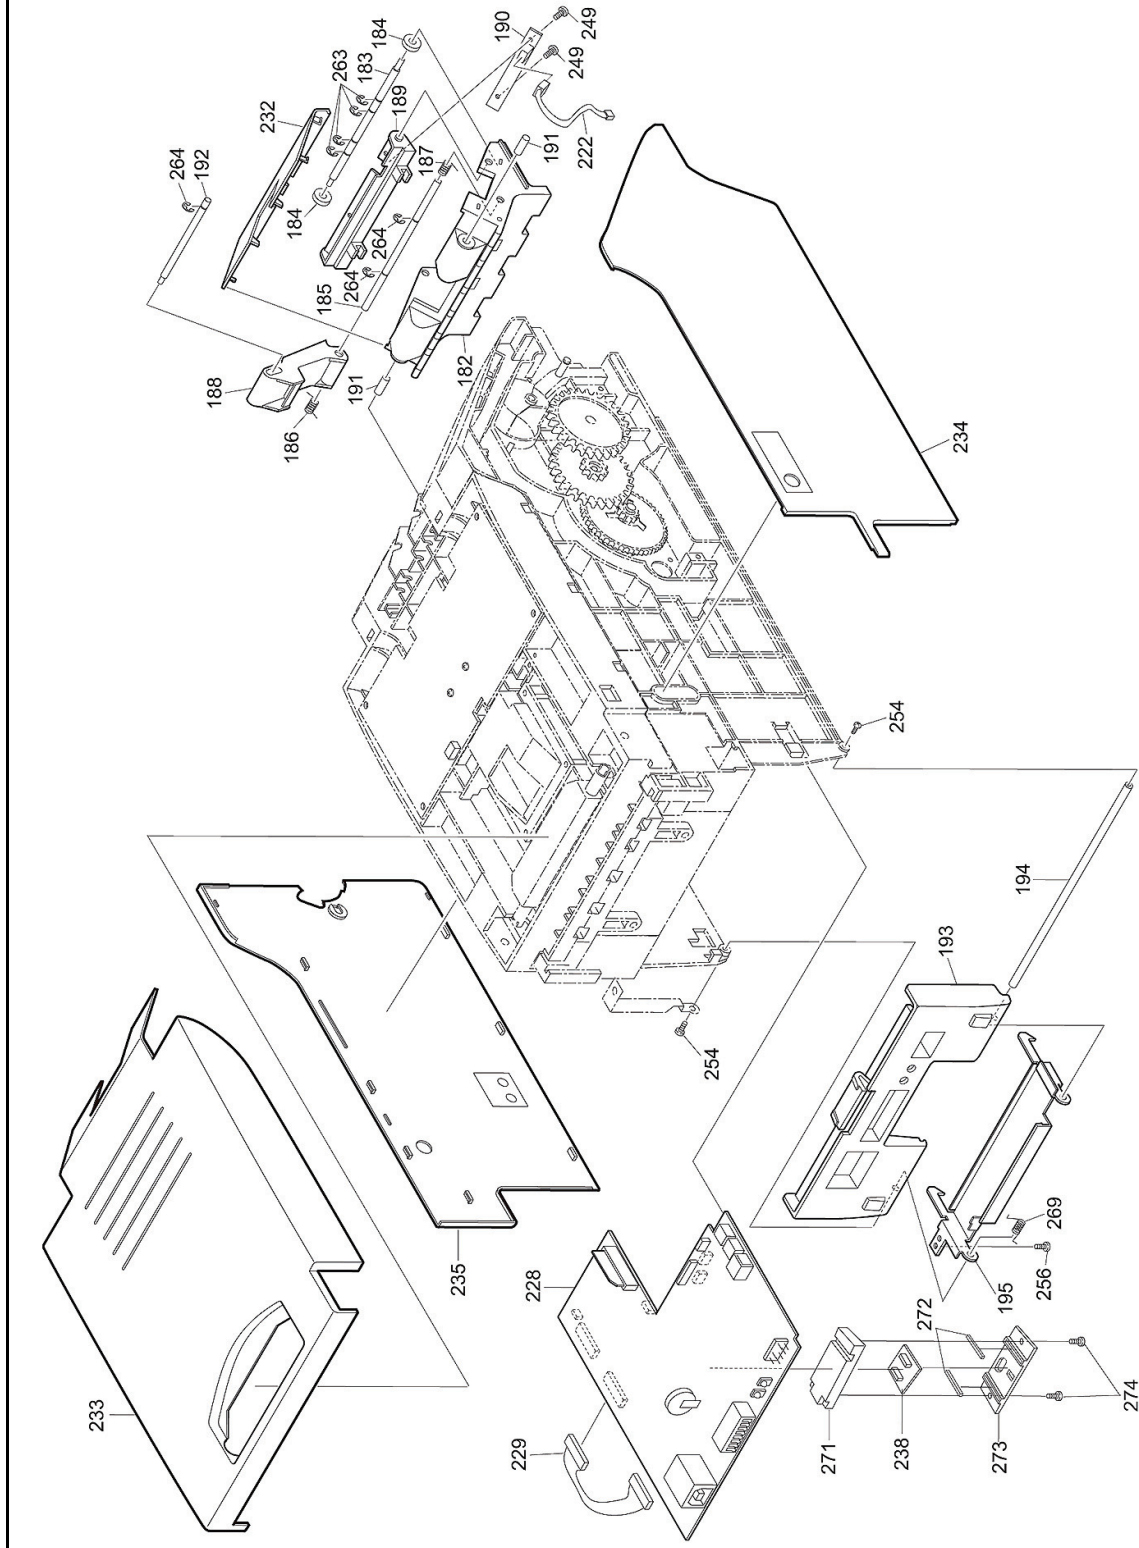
UBA Acceptor Unit Exploded View (Part 4)
